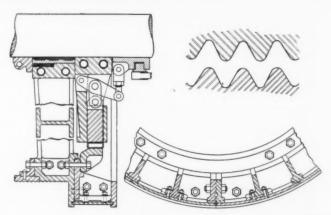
LAYOUT OF DRUM FLANGE, BRAKE PATH, AND CLUTCH, AND PROFILE OF TEETH
